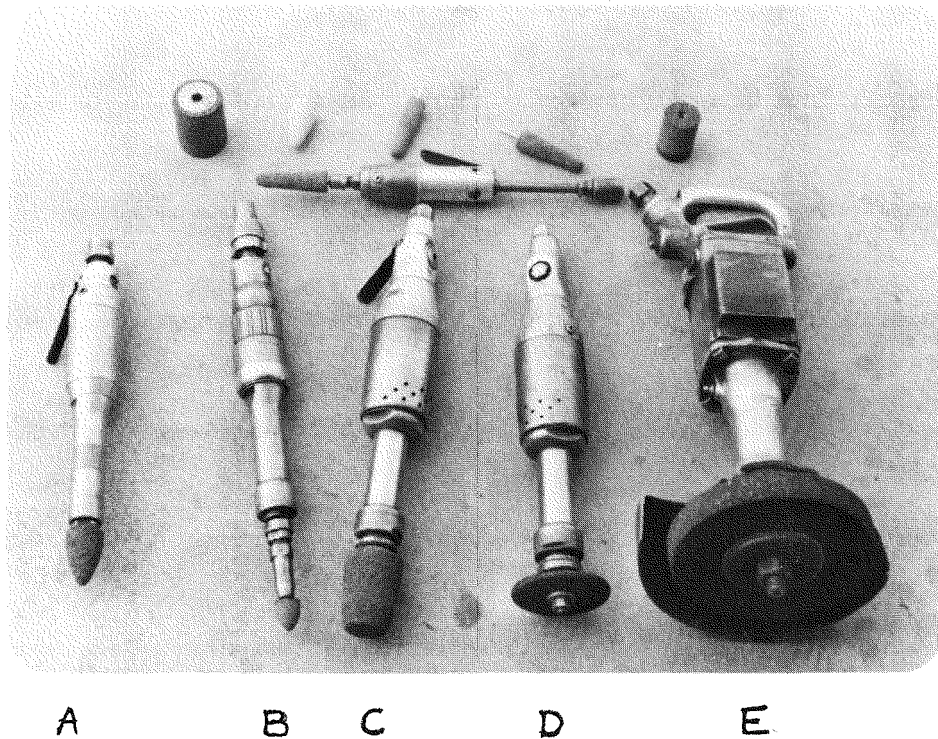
Grinders Used to Prepare Cavities for Welding
